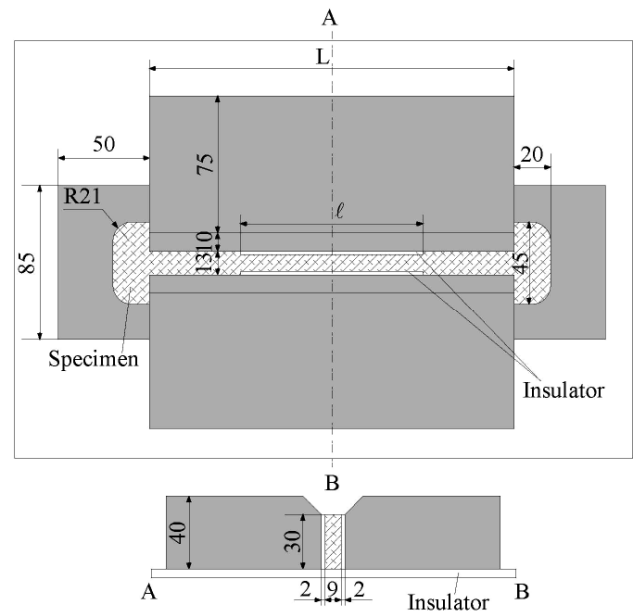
The shape and size of the permanent mold for solidification cracking test⁹.
